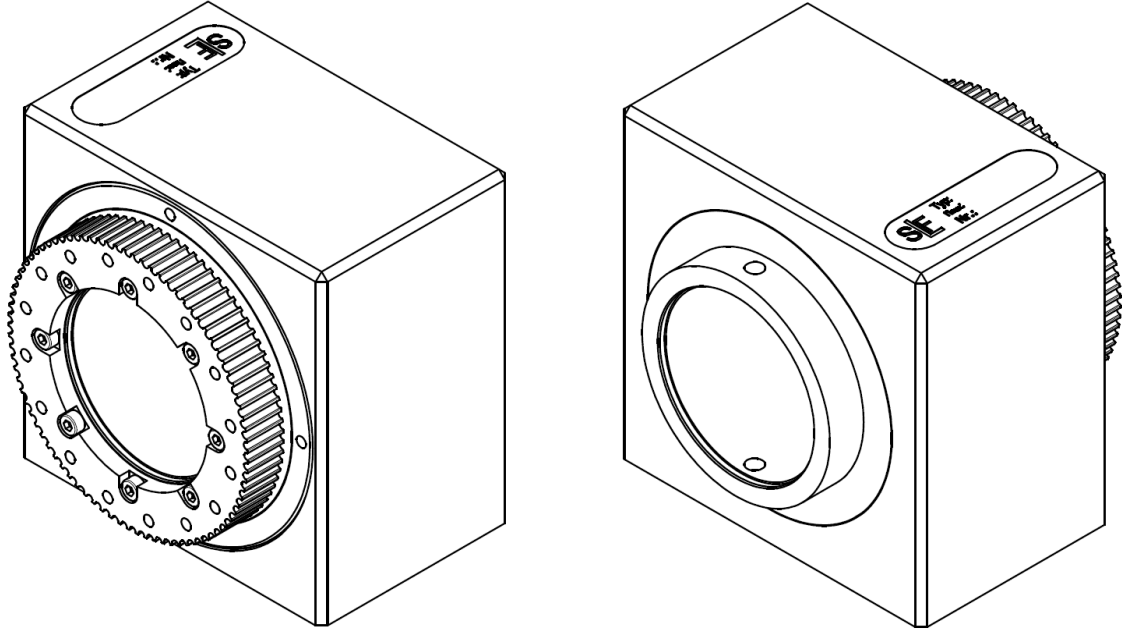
A drawing of the final spindle design. A 2 inch inner diameter SM2 threaded tube was used to hold a 2 inch diameter wire-grid polarizer. One end featured a no-slip gear to couple the spindle to a programmable motor via a toothed kevlar belt. The other end featured a radial through-hole. A CW laser was passed through the through-hole and measured with a photodiode to directly obtain a measurement of twice the spindle rotational frequency.
